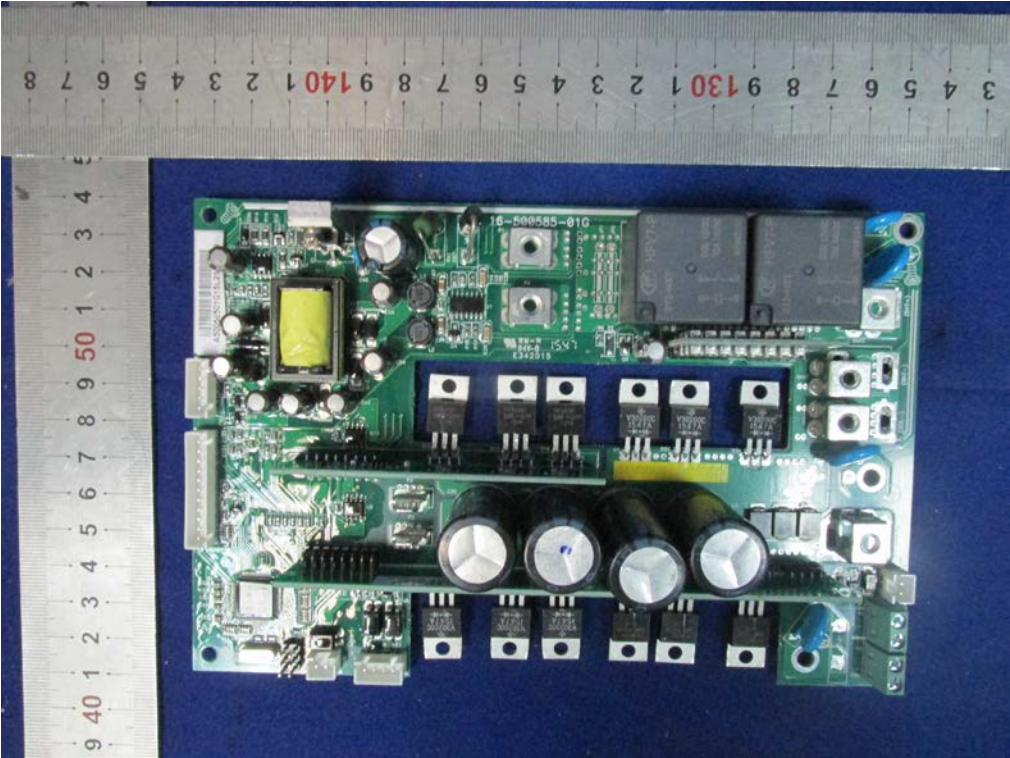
FlinInfini Lite 5kW-48V PCB of MPPT charger board components view
